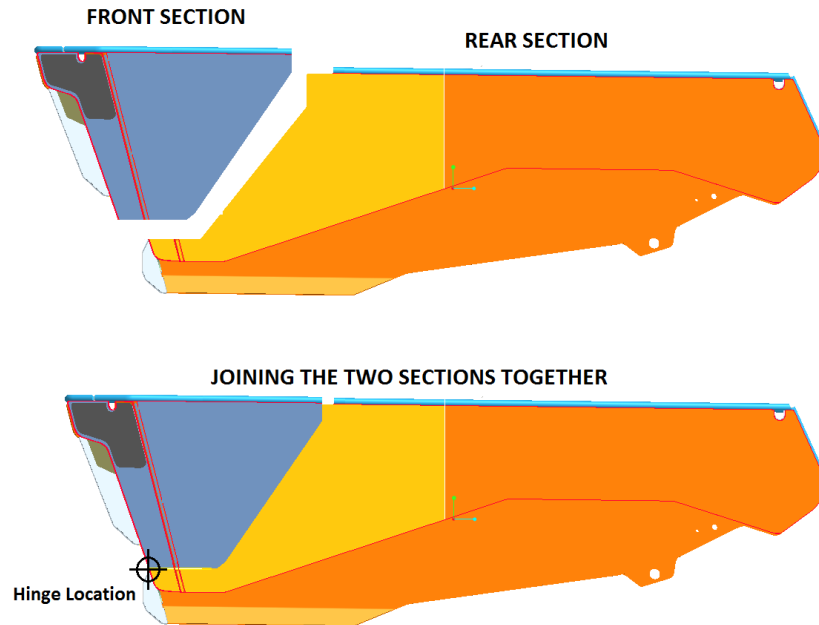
Side view of the front and rear sections forming the Folding Box Concept 1
